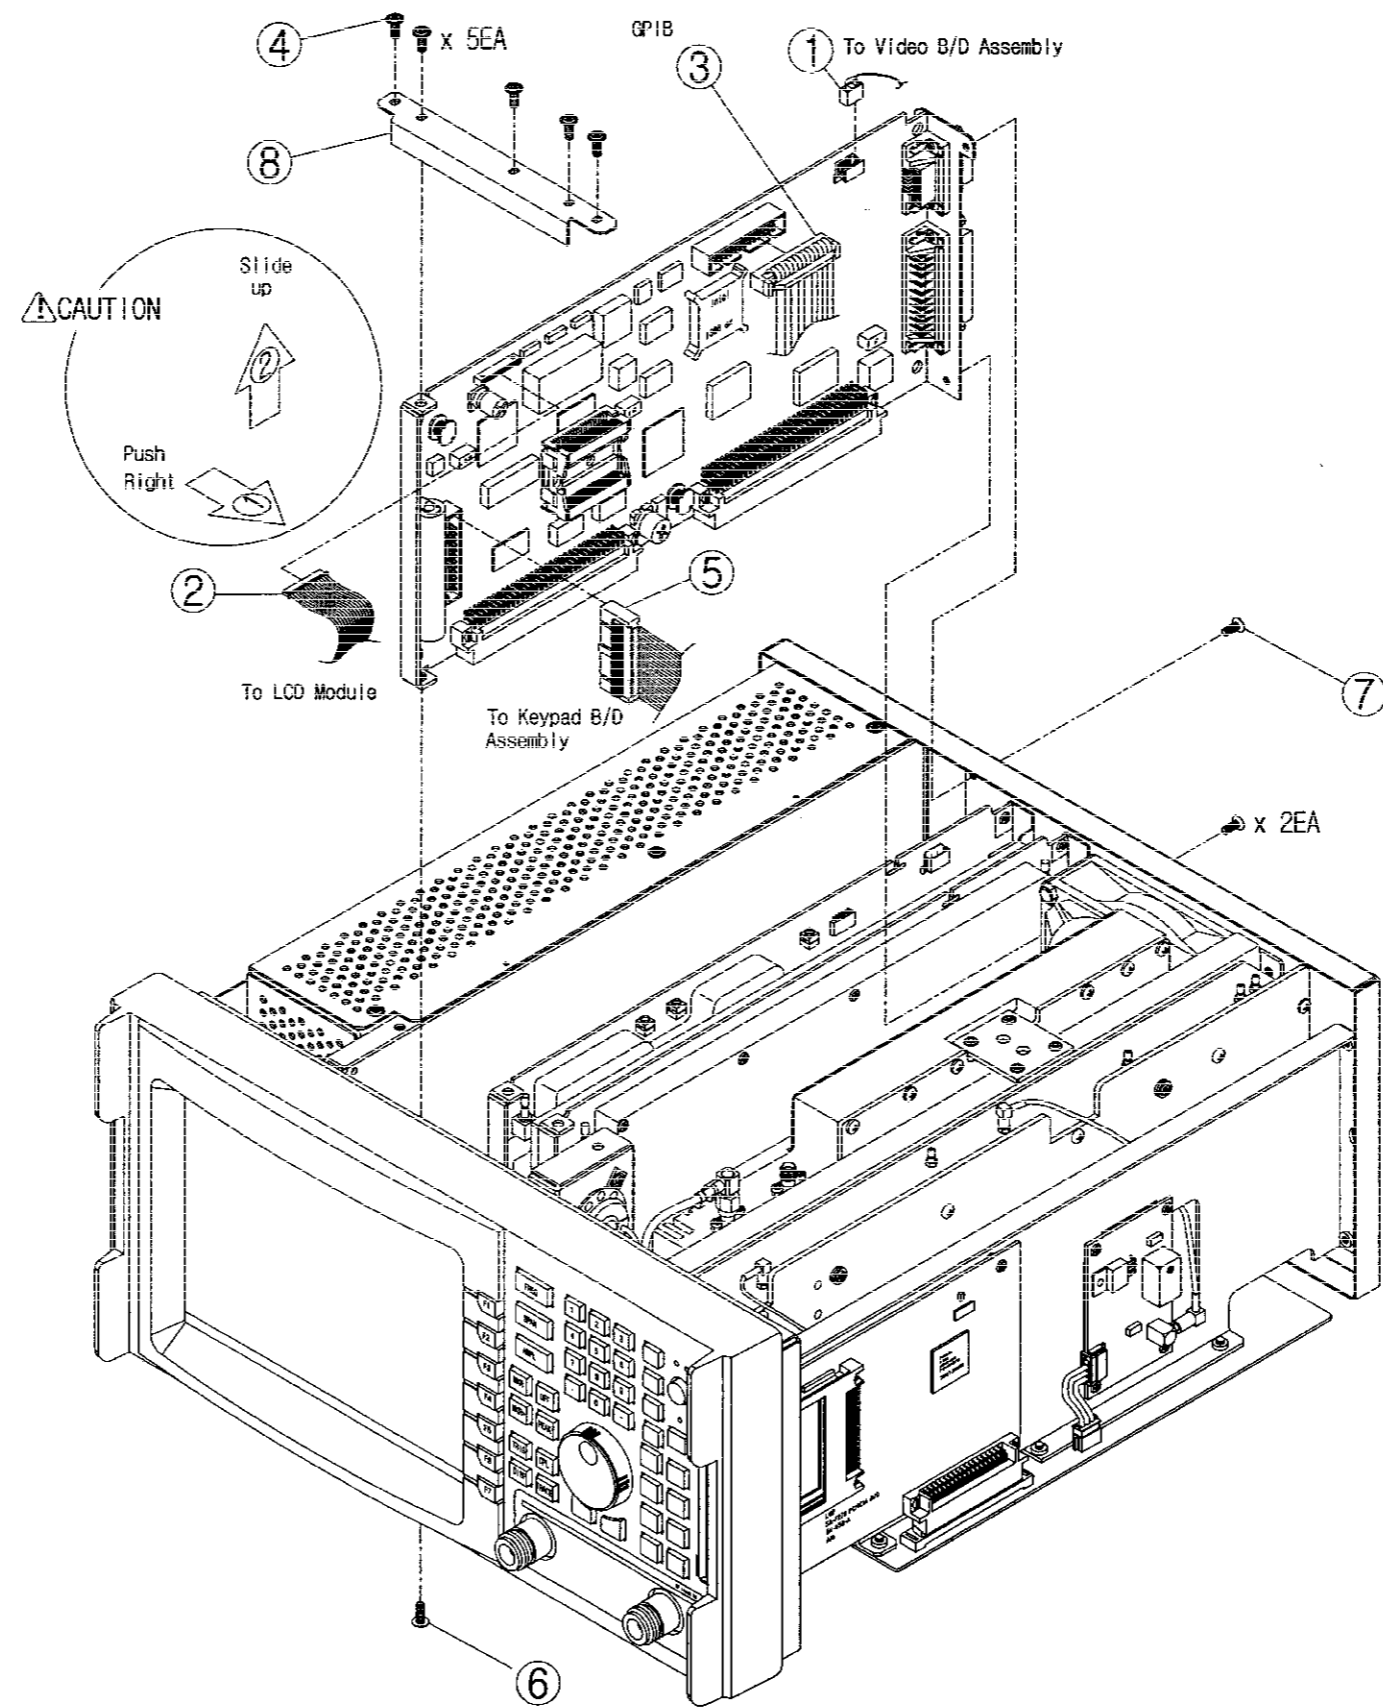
PROCESSOR BOARD ASSEMBLY 5-23
